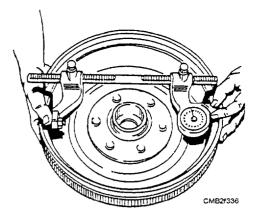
Using a drum micrometer to measure a brake drum.
